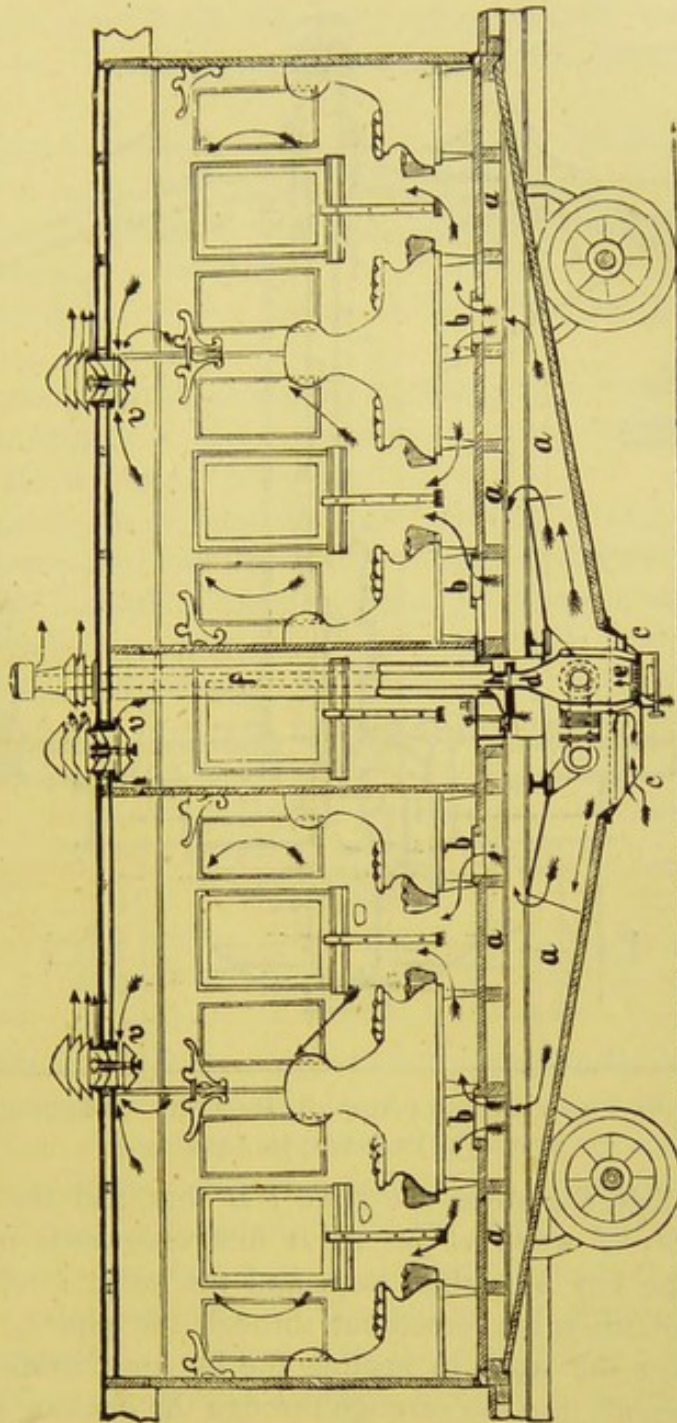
HEATING AND VENTILATION OF RAILWAY CARRIAGES (MOHRING'S SYSTEM), LONGITUDINAL SECTION.
